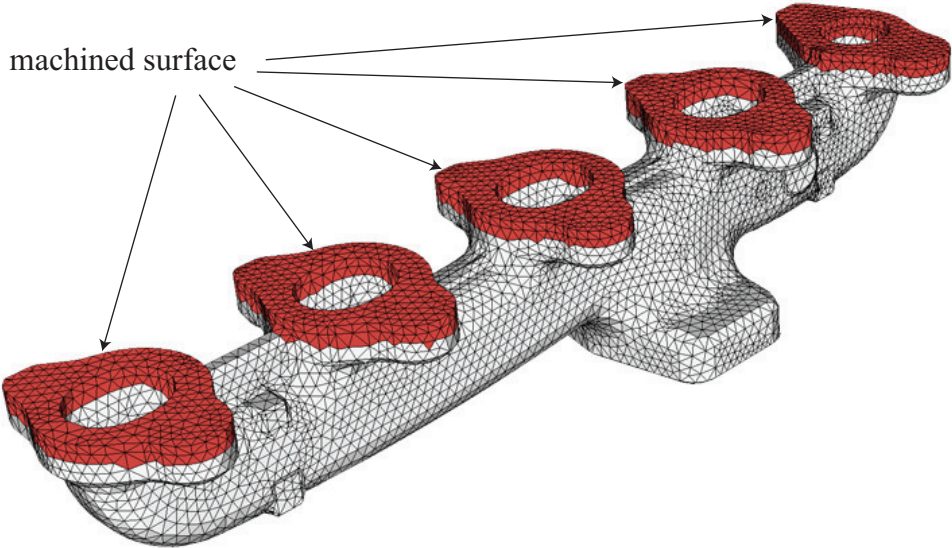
Example 2 - Industrial workpiece in face milling. 143,414 T4 elements, 107,900 DOF.
